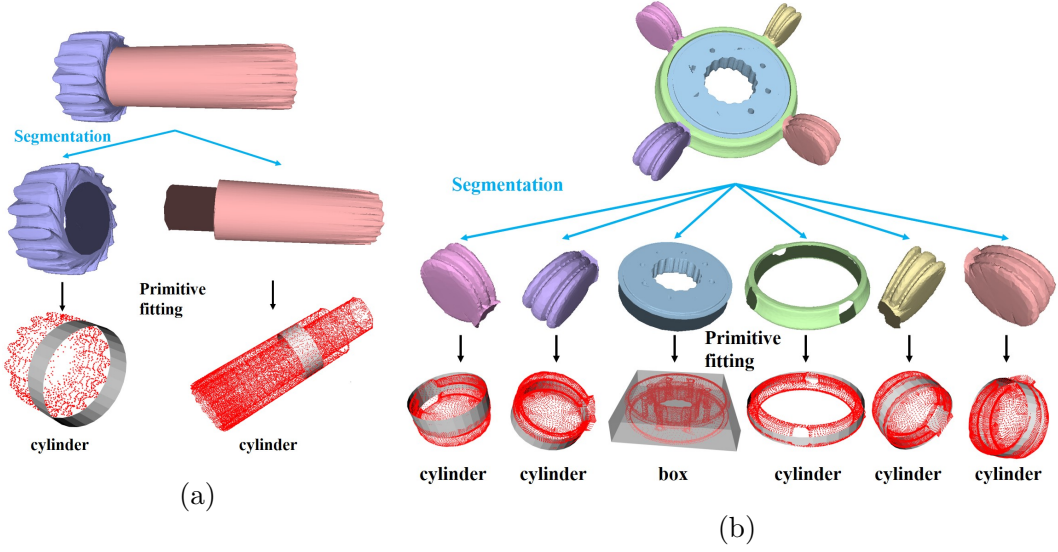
Two examples of fitting the segmented parts with shape primitives. (a) The inner sleeve shaft is segmented into two parts, and both the two parts are fitted appropriately by cylinders. (b) Five segments of the rotor are more closely fitted by cylinders and the other one is fitted with its bounding box, notice that the third segment looks cylindrical but it is empty on the cylindrical surface.
